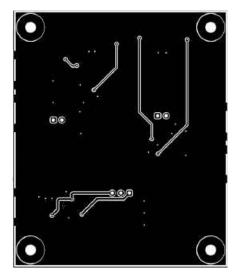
PCB Layout Example From LMK6 EVM - Bottom Layer
